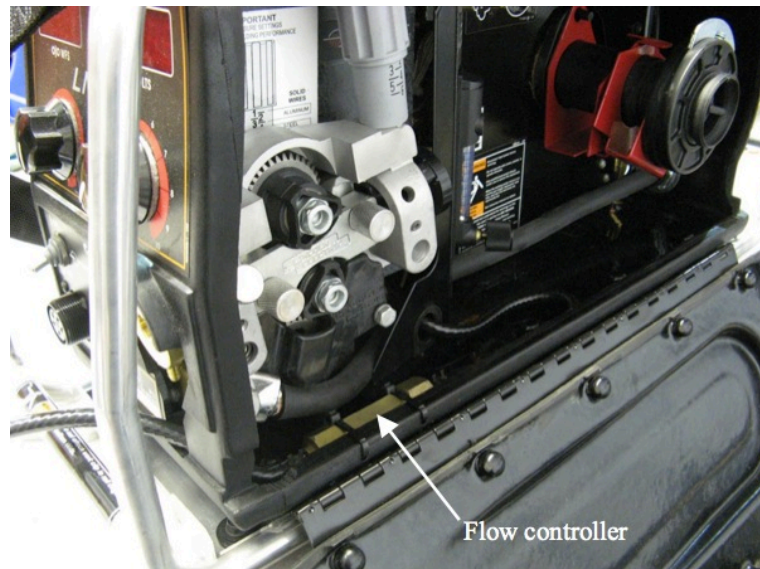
Shielding gas flow controller installed in wire feed unit
